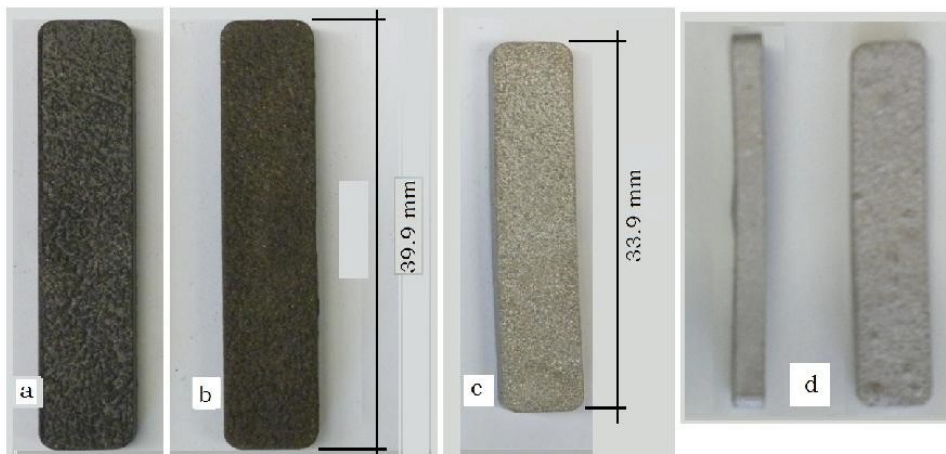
Thin part a) green, b) brown, c) sintered and defects that remained during sintering d) thin part and e) thick part
